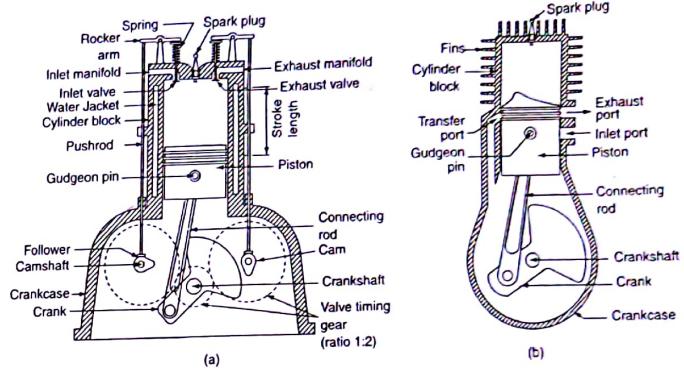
(a) Four-stroke petrol engine; (b) two-stroke petrol engine.
